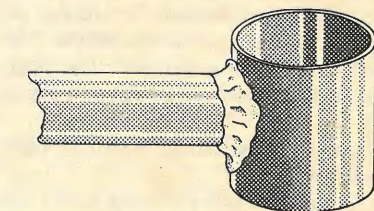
Method of mounting assembly on masthead. Unit is clamped in sleeve.
